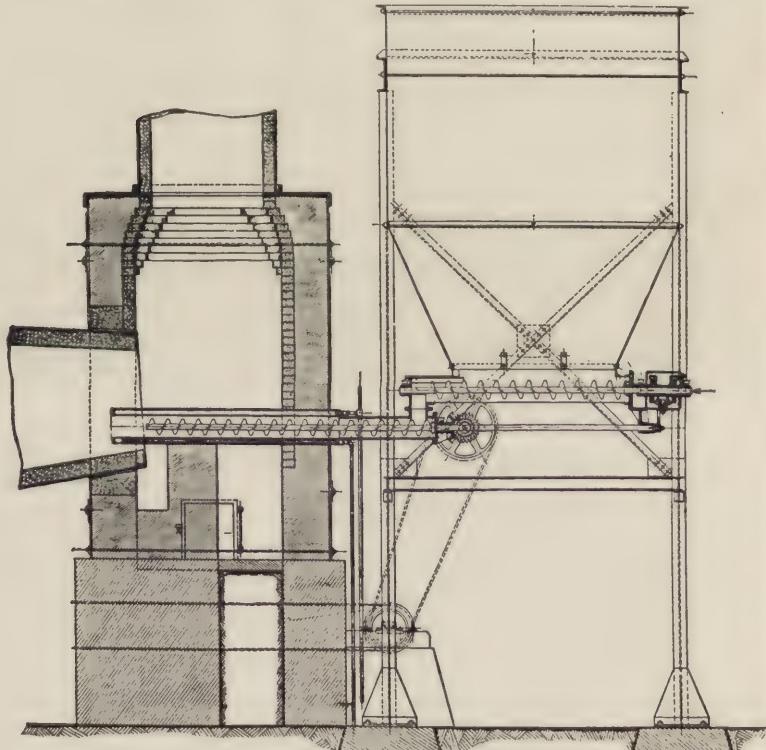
Stock bins and water-jacketed conveyor for feeding raw material into kiln.
